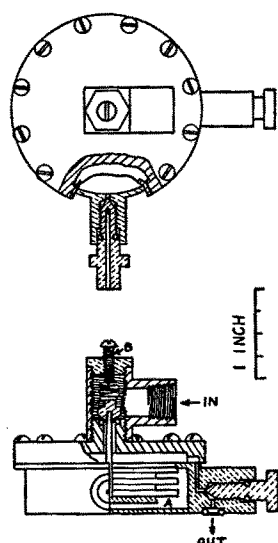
Sectional drawing of temperature compensating pressure regulator used with radial cloud chamber.
